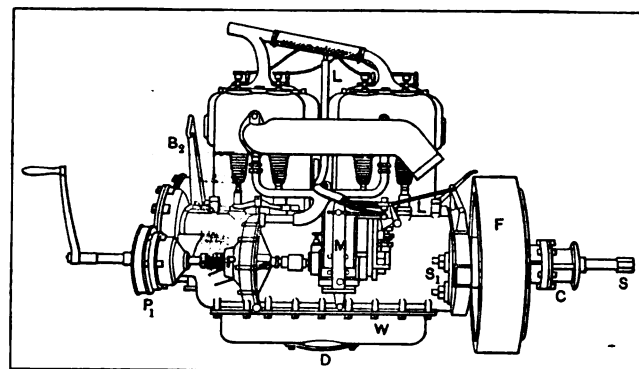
Exhaust side of the motor, showing method of driving the pump and magneto
